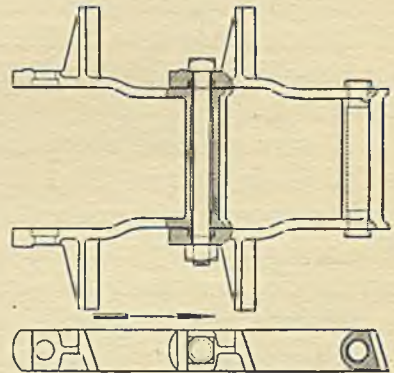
Diamond Coal Conveyor Chain, Old Type.
